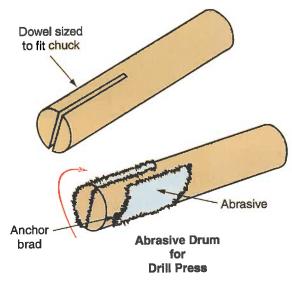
Slit a dowel with a band saw to make an abrasive drum for the drill press.
